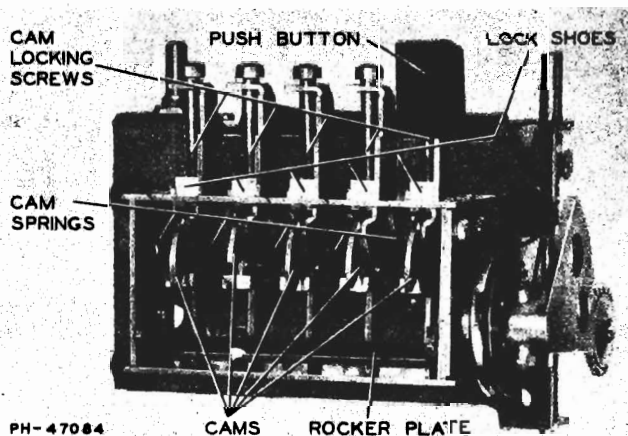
BOTTOM VIEW OF PUSH BUTTON MECHANISM
